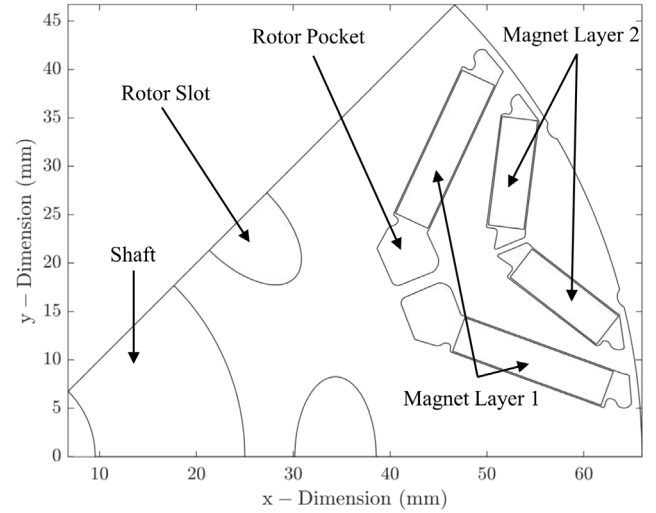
Custom rotor geometry of re-engineered SUV machine.
